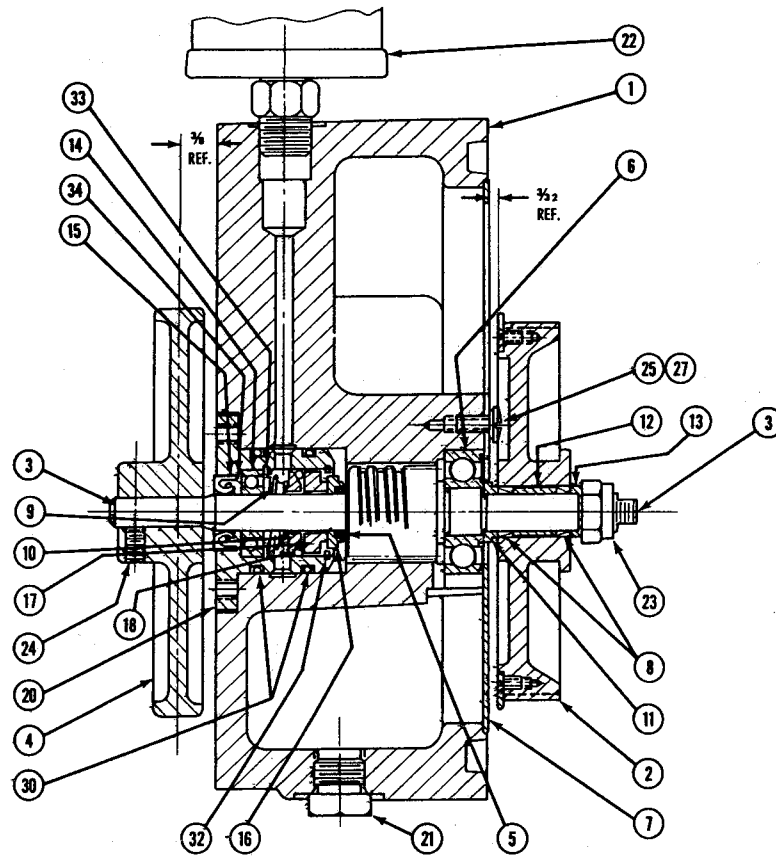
TRANSMISSION SECTION SHOWING CARTRIDGE SEAL
